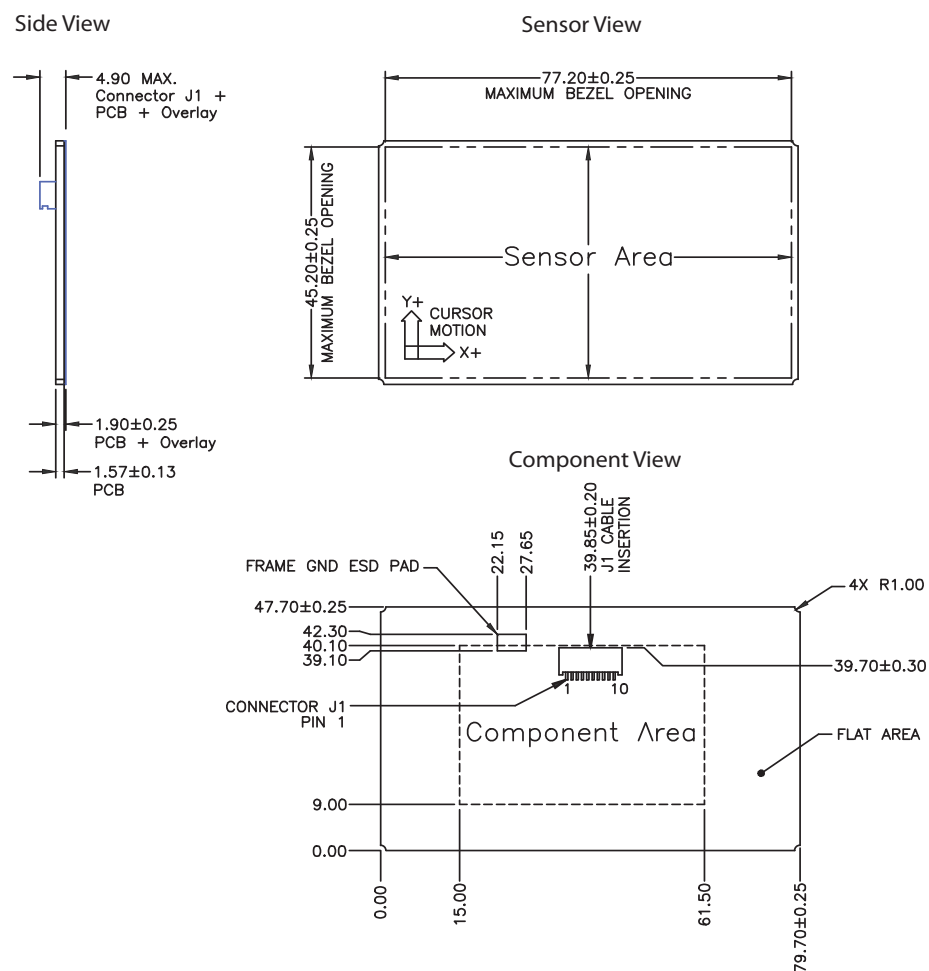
TM080048-1 Design Dimensions - Side, Sensor, and Component Views
